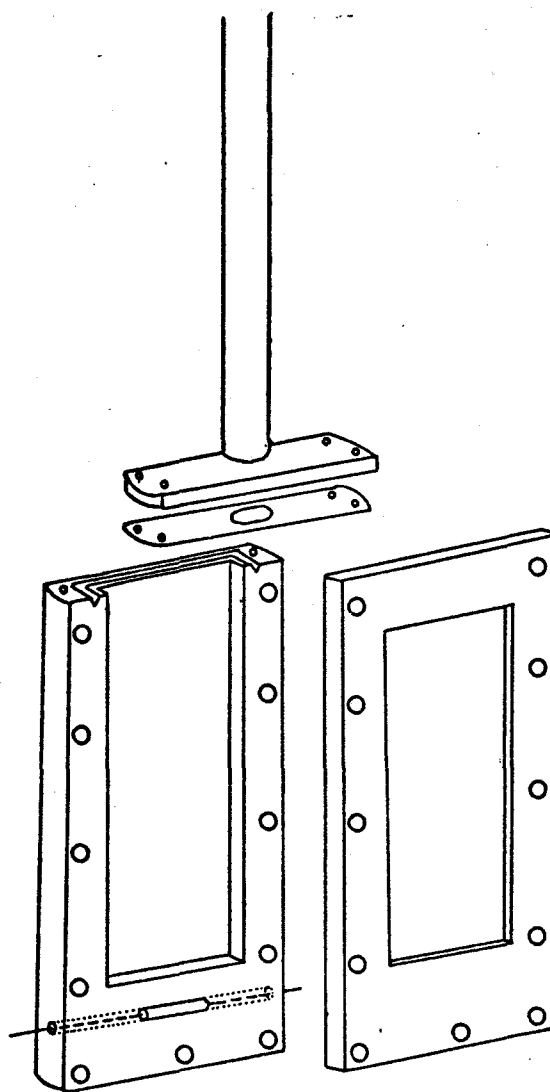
An exploded view of the sample chamber. The chamber was constructed of stainless steel with thin (0.040 inch) windows for the neutron beam. The carbon resistance thermometer was mounted in the base. Indium vacuum seals were used in all joints. The drawing is actual size.
